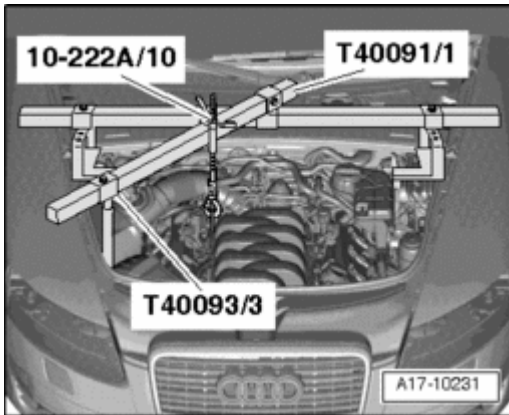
Identifying Special Tools - Secondary Air Injection (Air) Solenoid Valve -N112-, Checking
